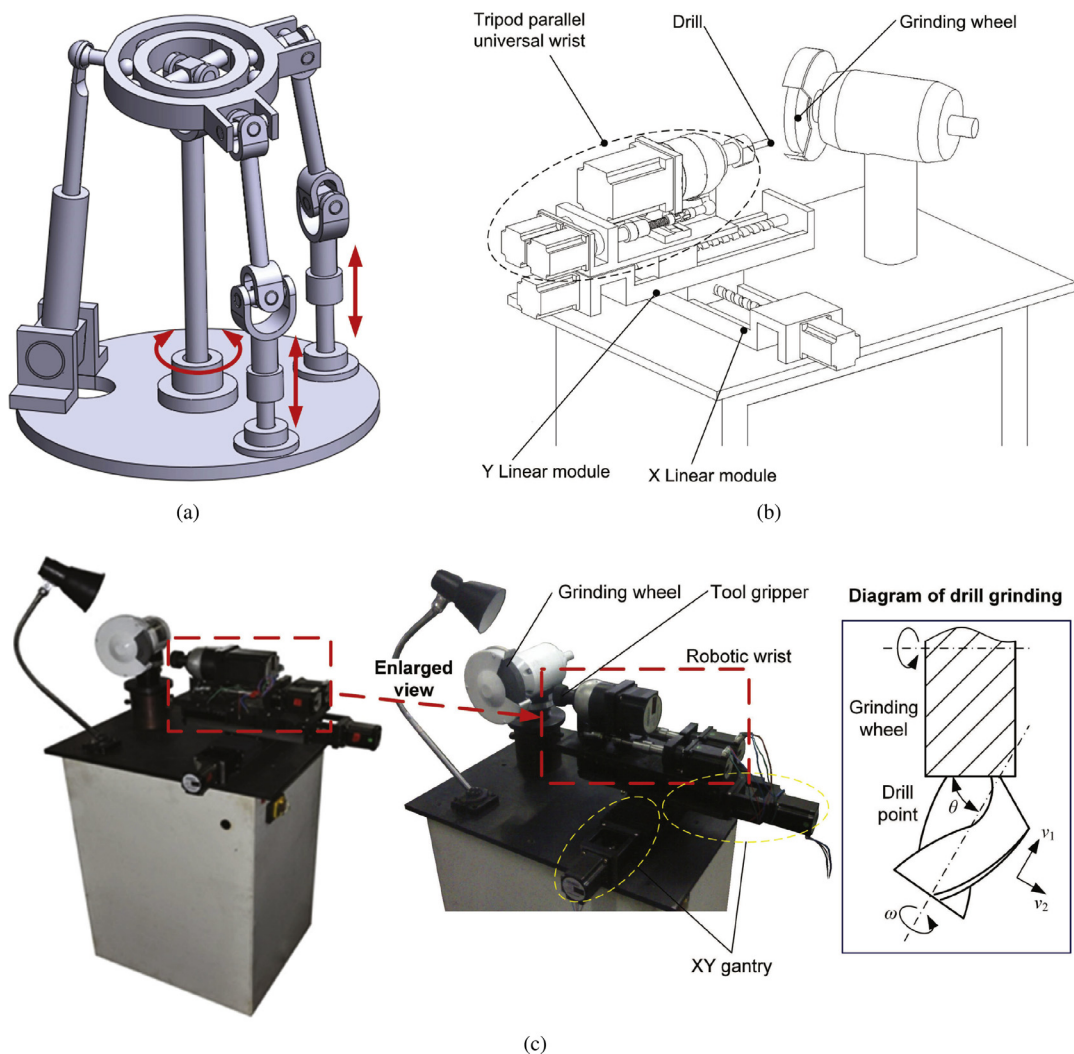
The drill point grinder based on the tripod parallel universal wrist: (a) wrist mechanism; (b) CAD model; (c) a prototype and the diagram of drill grinding [4].
